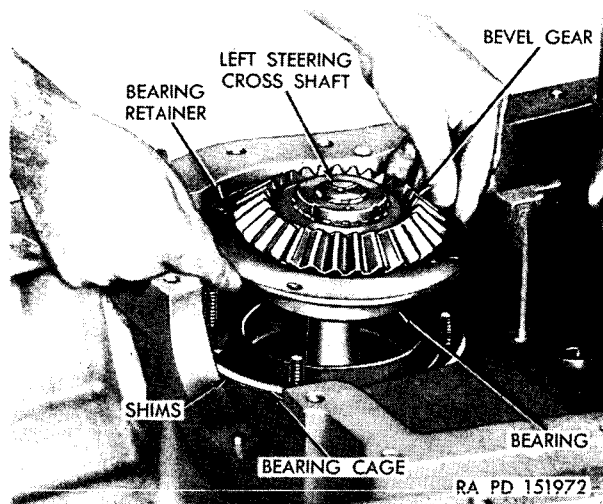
Removing or installing left steering-cross-shaft and bearing assembly.
